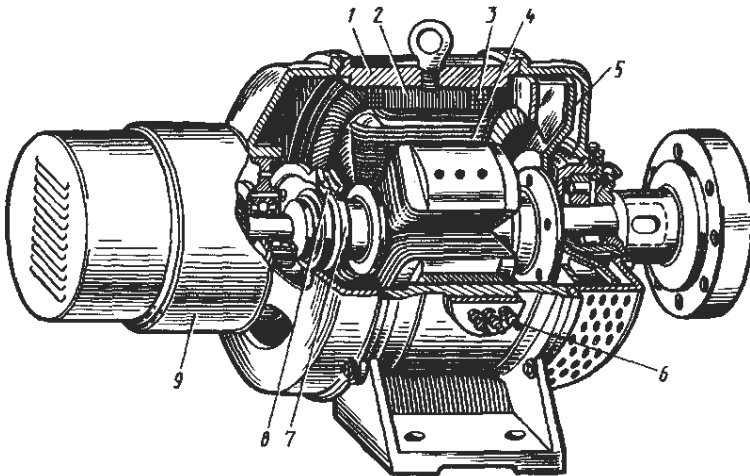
Salient pole machine: 1- machine frame, 2 – armature core, 3 – armature winding, 4 – rotor, 5 – fan, 6 – termination, 7 – slip rings, 8 - brushes, 9 - exciter
